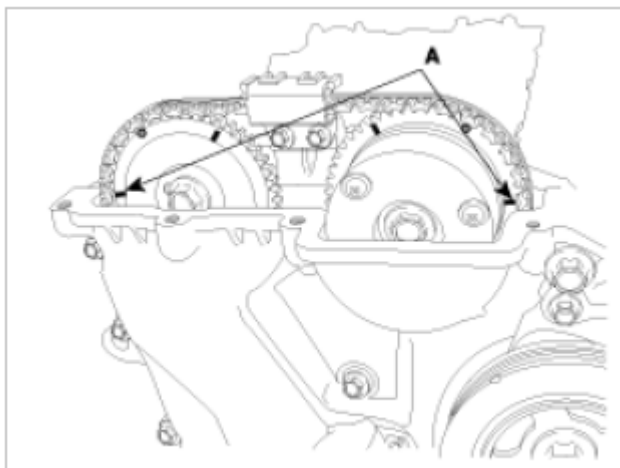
Identifying Mark On Camshaft Timing Sprockets
